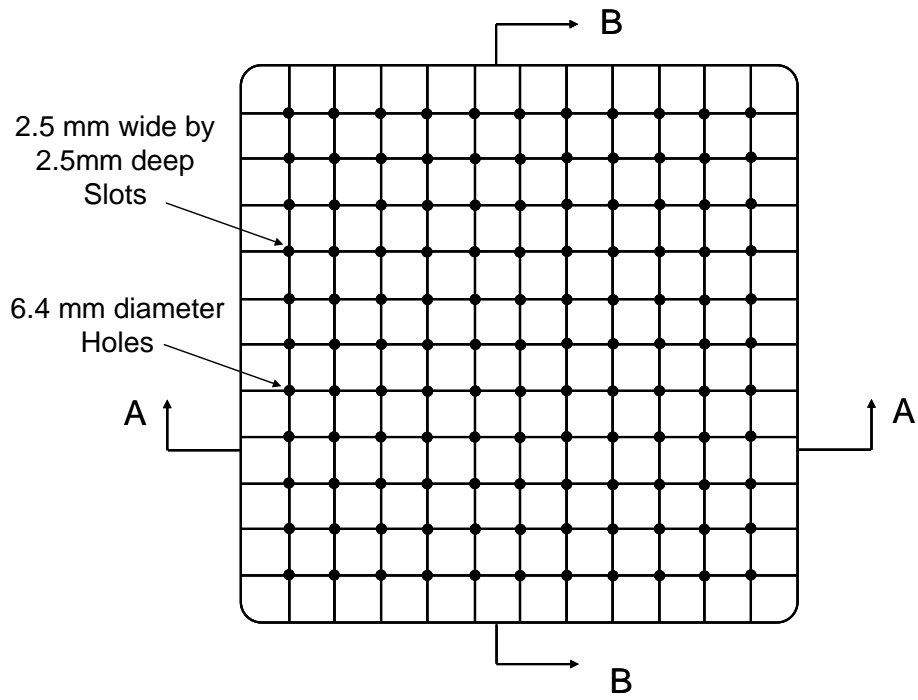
Plan view of PVC support plate with 22 slopes and 121 holes.
